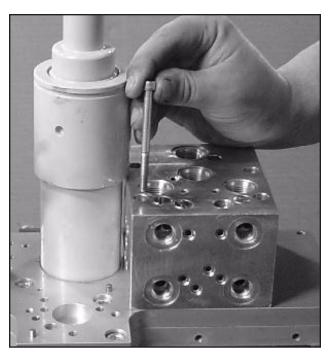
Use a 5mm allen wrench to remove the 5 bolts which fasten the Super V Valve Block to the Base Plate.
